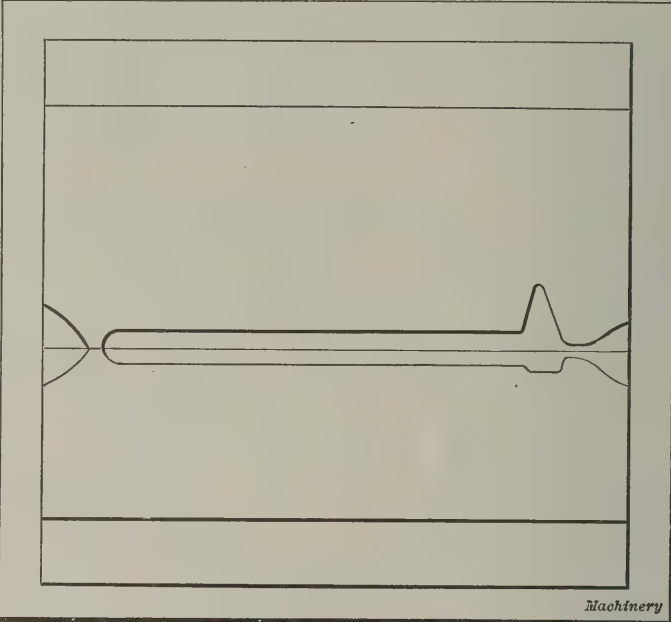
Right-hand Side Elevation of Dies, showing Breakdown
